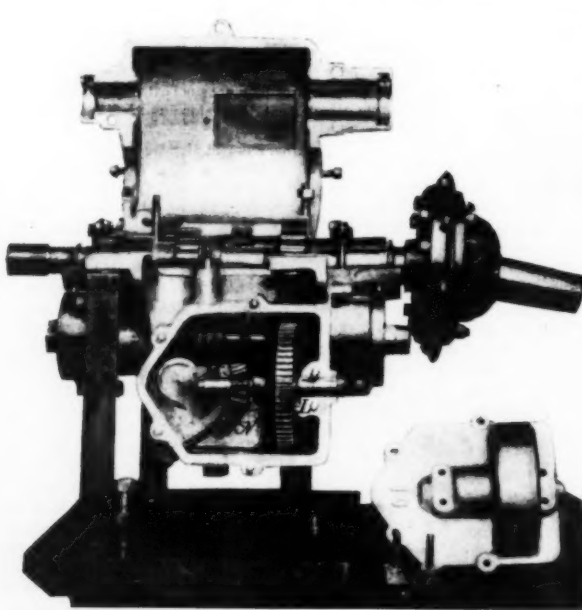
SIDE VIEW OF RENAULT TRANSMISSION, SHOWING NEW CONTROLLING ARRANGEMENT AND UNIVERSAL JOINT OF DRIVING SHAFT ON RIGHT.
